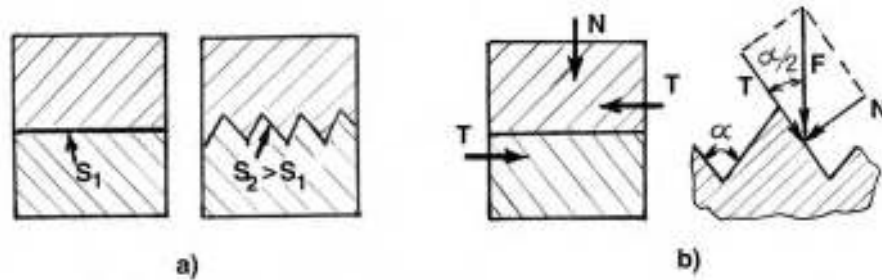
Cogging advantages: a – increasing welding surface;
